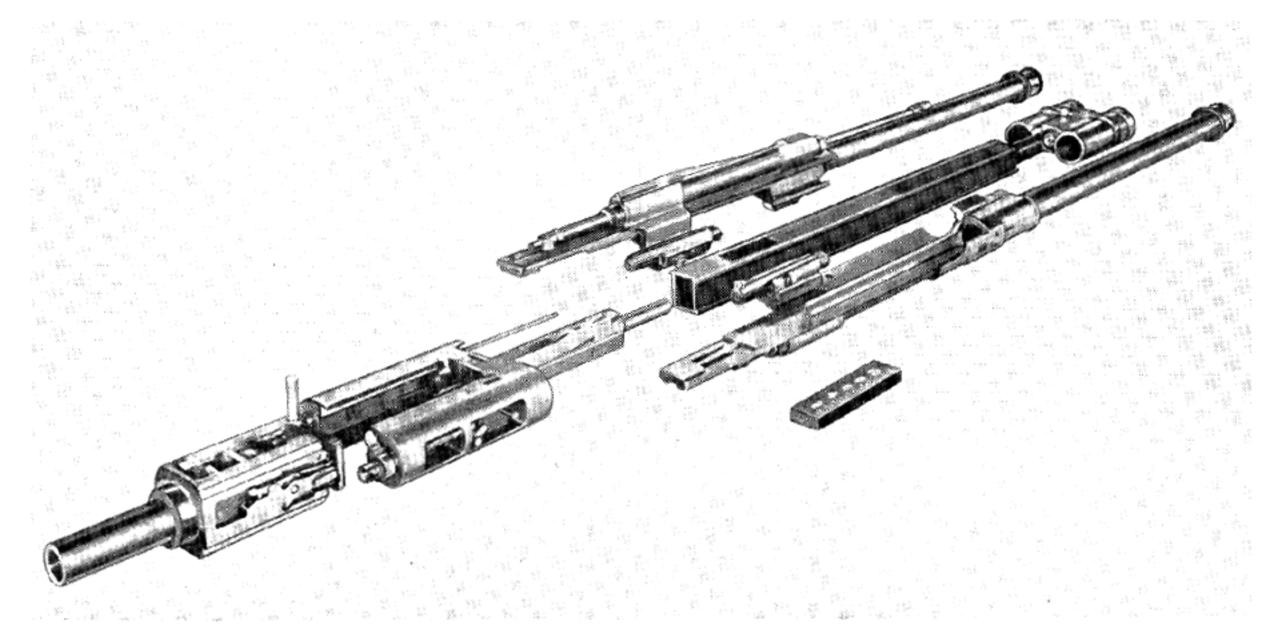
Operating parts of Skoda 30-mm FLAK Model B Automatic Gun.
